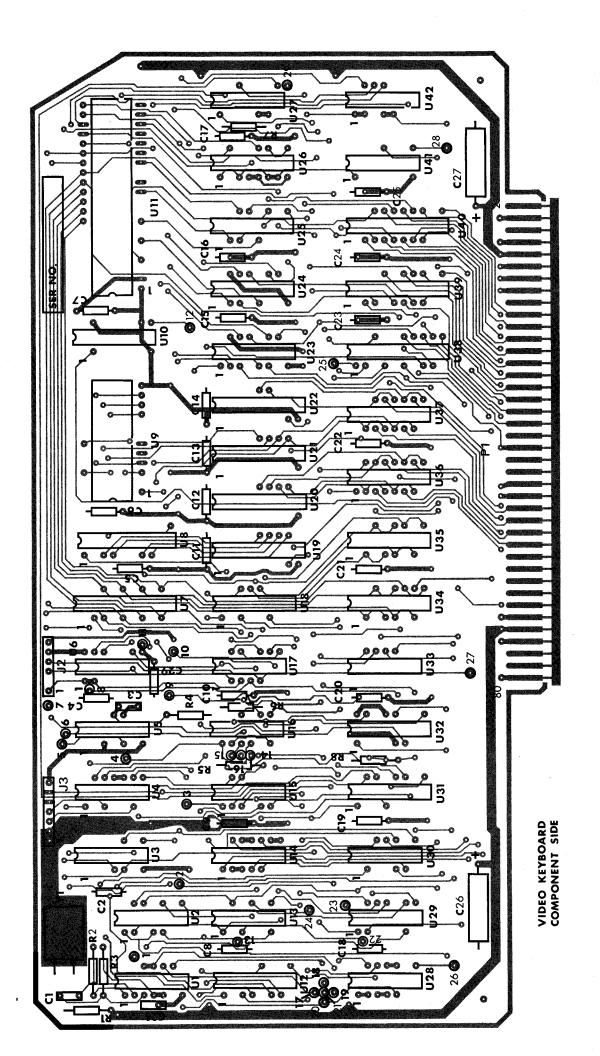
X-Ray View Video Keyboard Printed Circuit Board - Component Side
